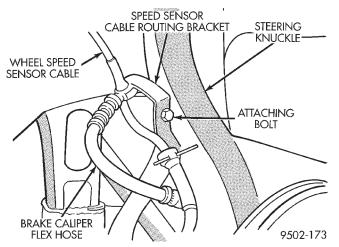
Wheel Speed Sensor Cable Routing Bracket
